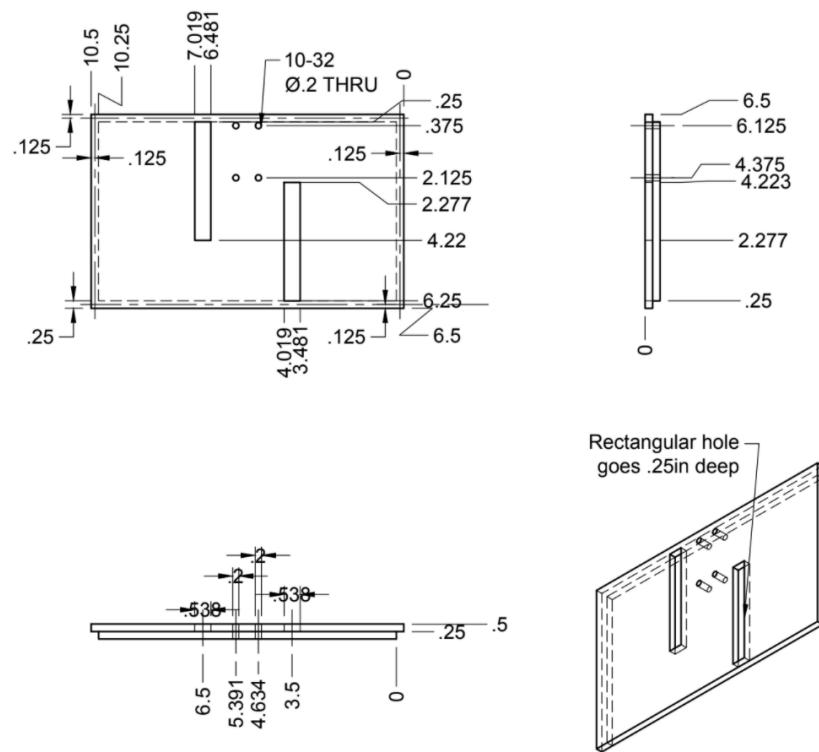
This is an example of a part drawing that lead to confusion as to which side the channels on the face were supposed to be cut in relation to the channels at the sides. While the side channels were supposed to be cut on the opposite side of the face channels, the person machining mistakenly cut them both on the same side.
